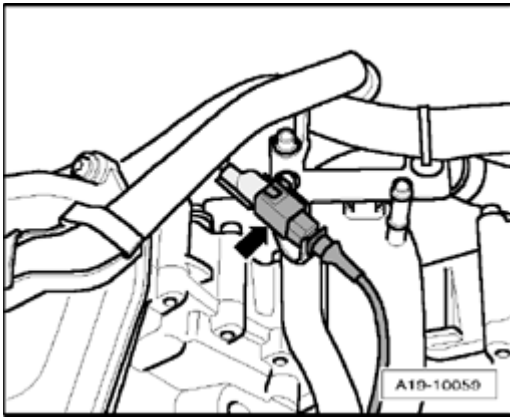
Intake Manifold Lower Section Electrical Harness Connector
